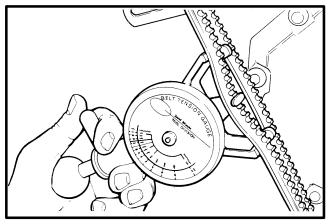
GAUGE TO CHECK DRIVE BELT TENSION
